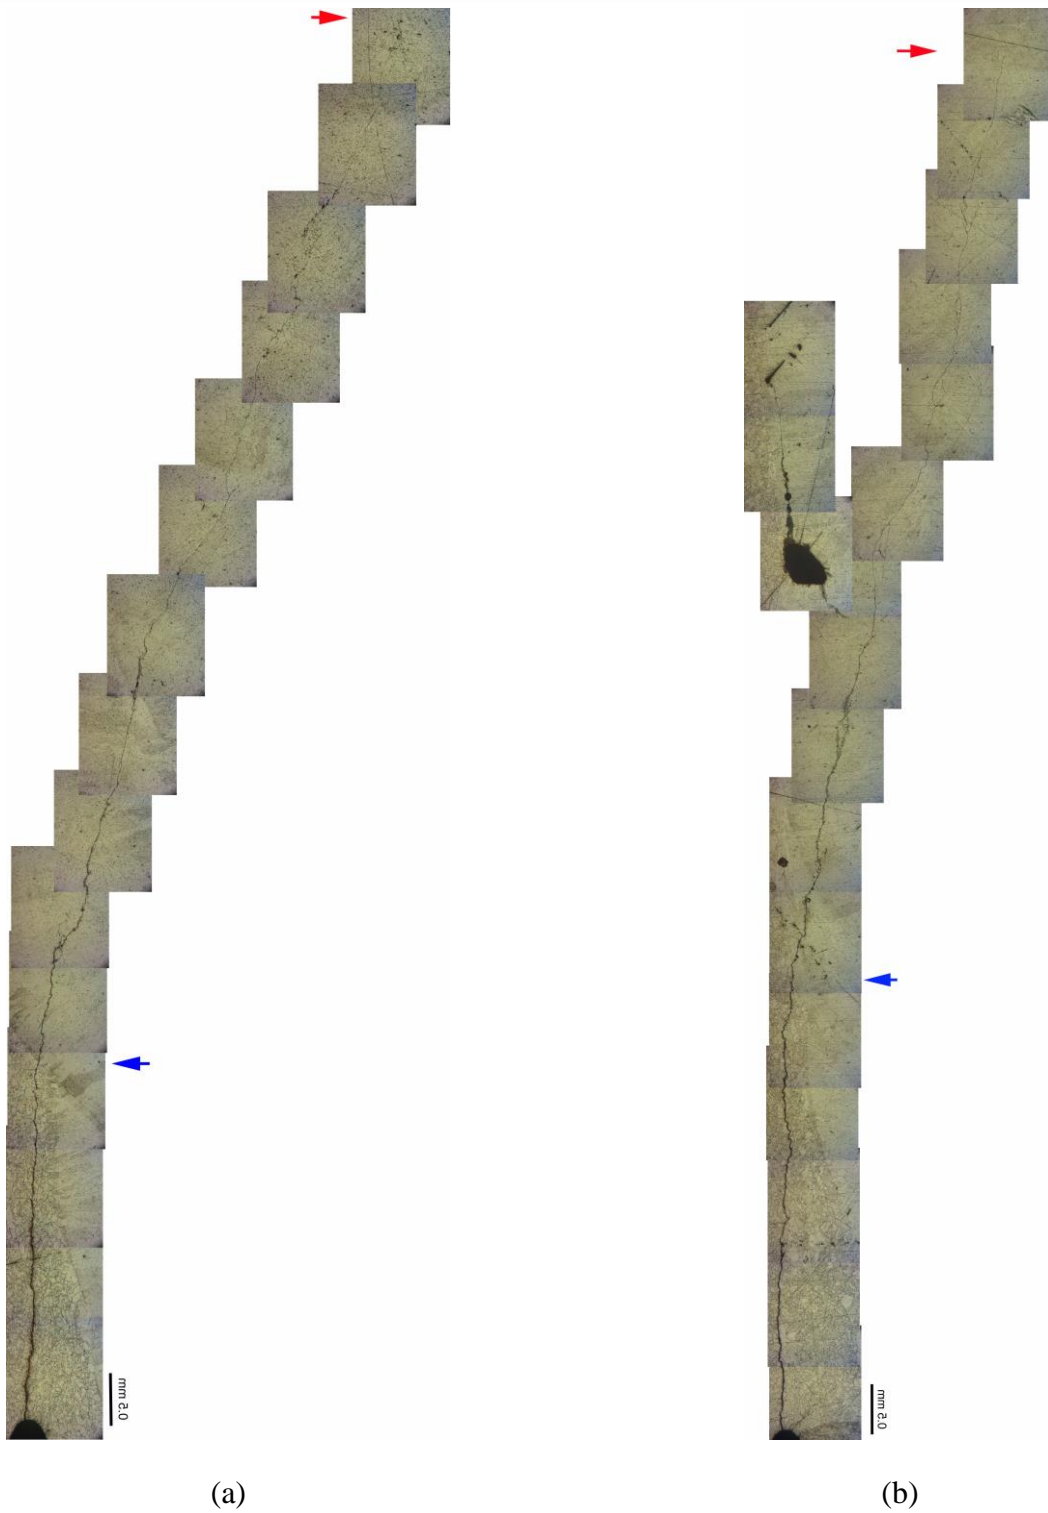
Side surfaces of specimen CN690-TS-1: (a) side 1, and (b) side 2. Blue arrows indicate the locations where the crack intersected the Alloy 152 weld, and the red arrows indicate the end of the test. Crack advance is from bottom to top.
